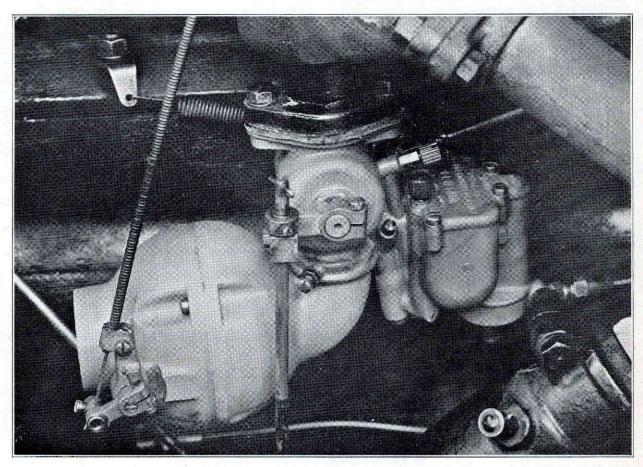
PHOTO SHOWS INSTALLATION ON 1928 WILLYS-KNIGHT 70-A
